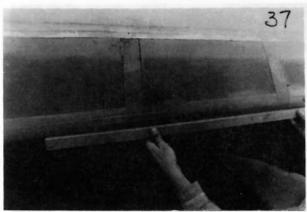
Using canted straight edge to conform contour of wing nose.
